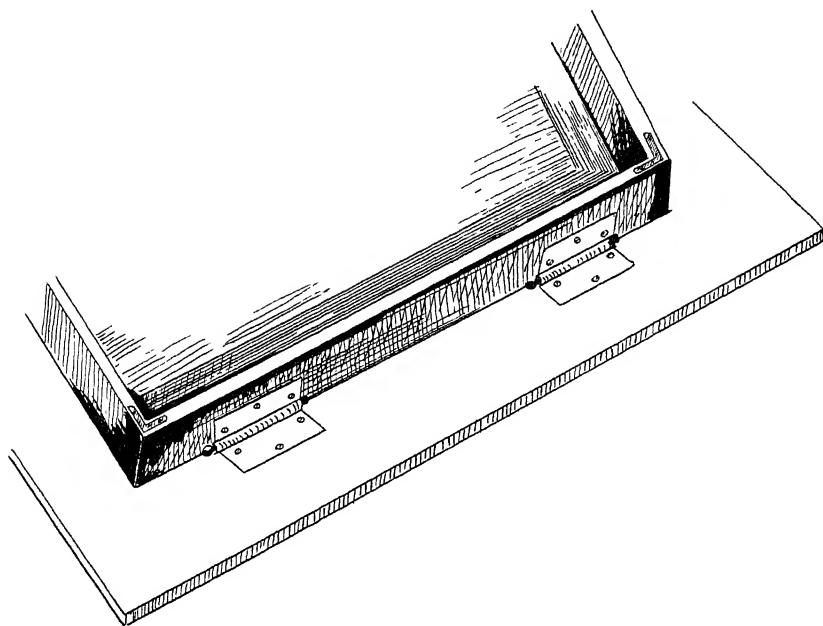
How to Fasten Printing Frame to Printing Board or Bed
